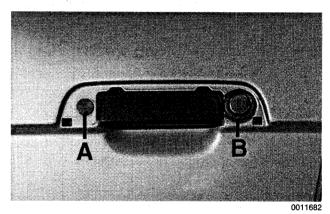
Door handle retaining pin (A) and lock collar nut (B). Door handle trim shown removed.
